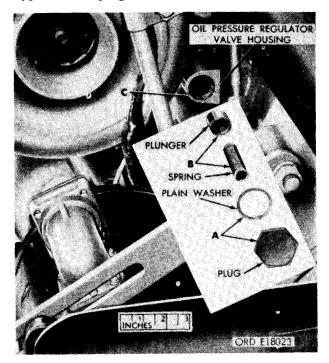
REMOVING, INSTALLING, AND INSPECTING OIL PRESSURE REGULATOR VALVE.
